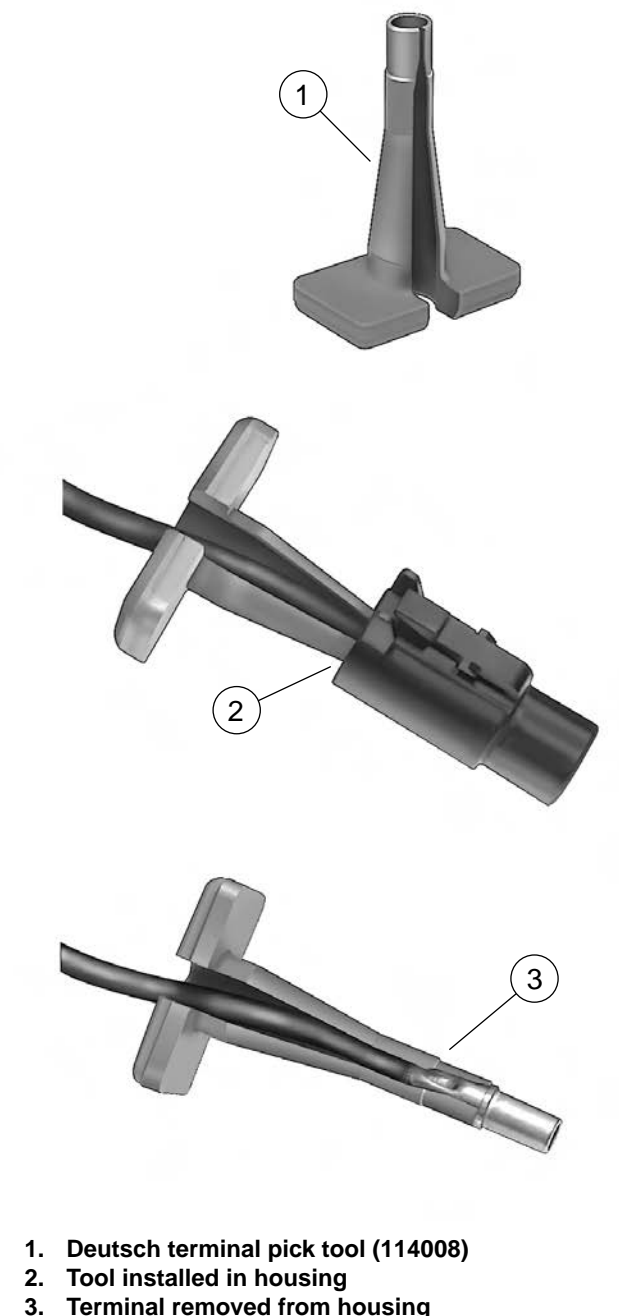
Deutsch 1-Place Connector: Remove Socket/Pin Housing
